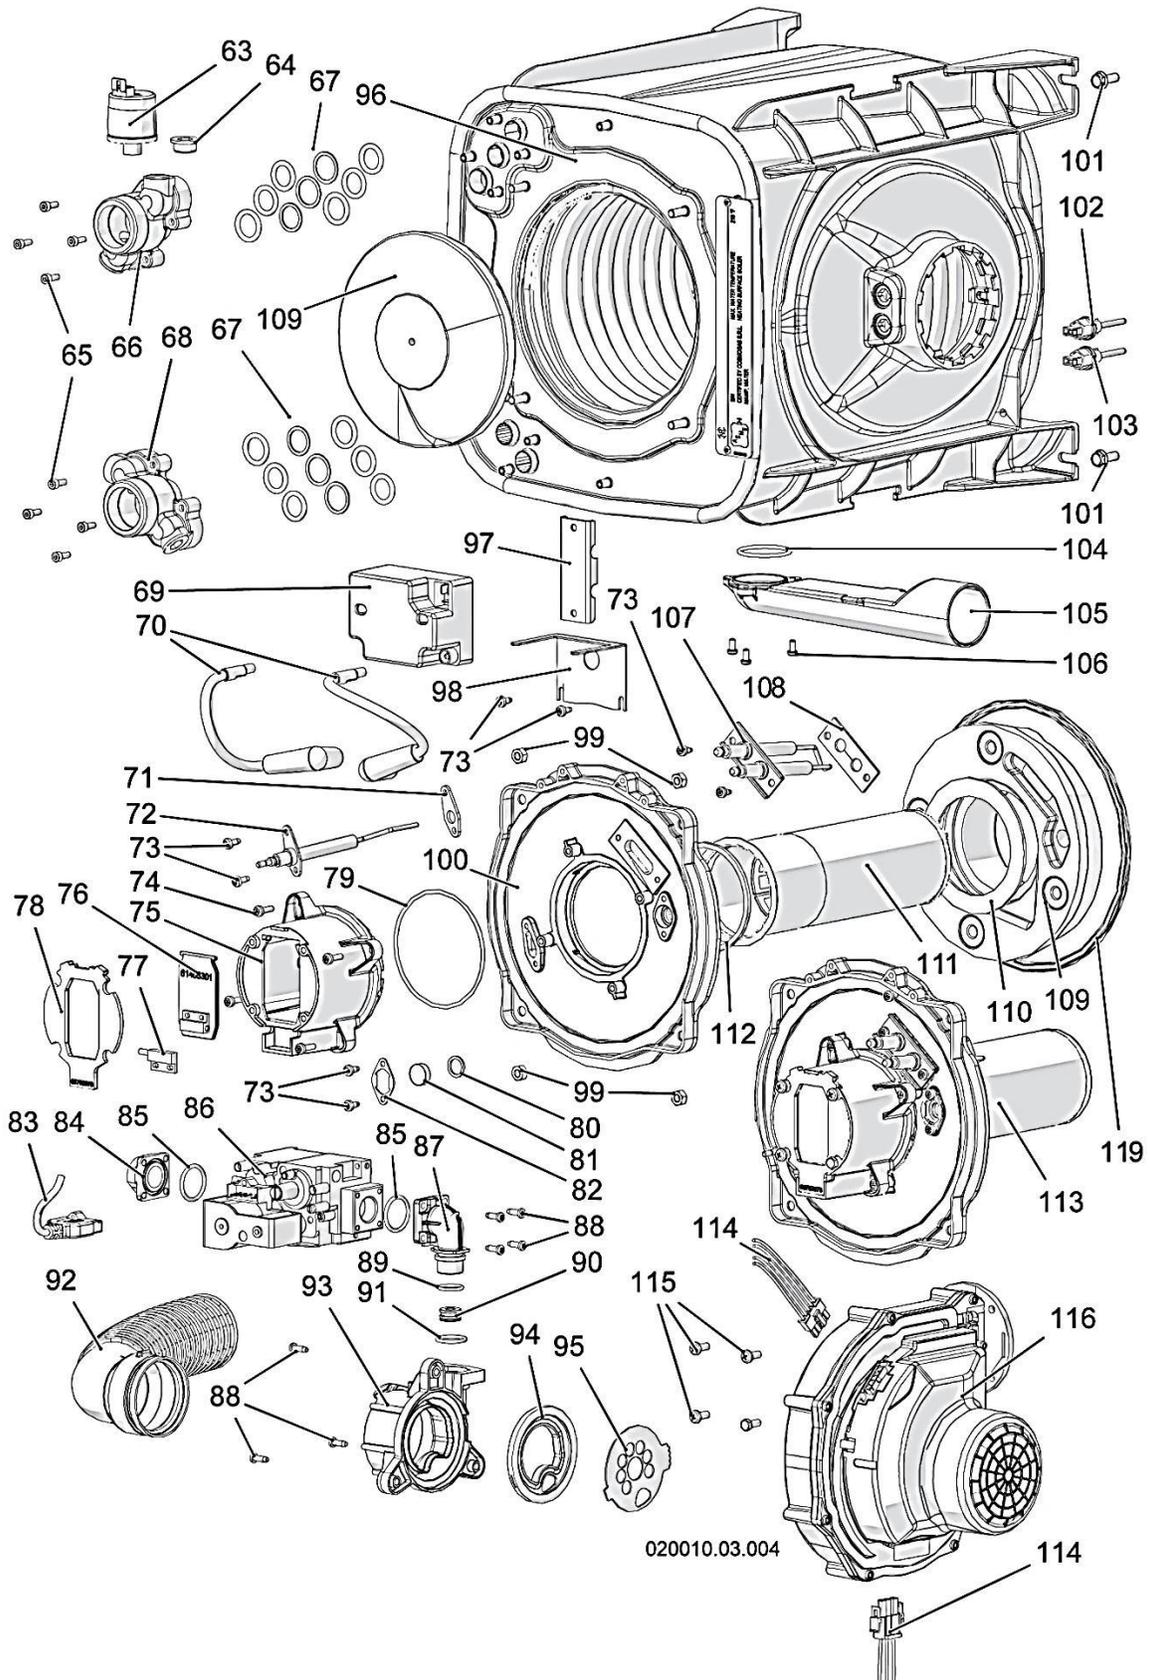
AM 399/500 Burner/Fan Assembly Parts Drawing
